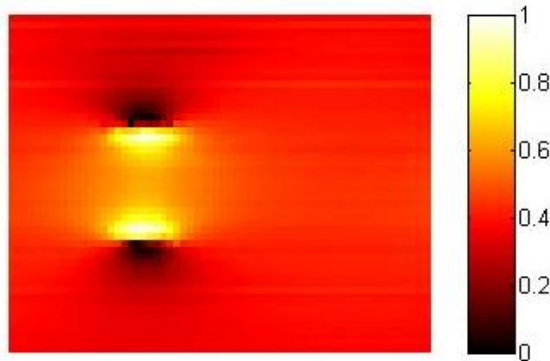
Image of the defective tube surface for 16mm length of rectangular notch
